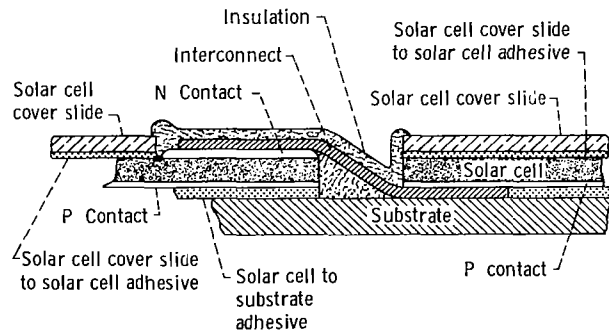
Cross sectional view of insulated solar cell assembly showing dielectrics.
